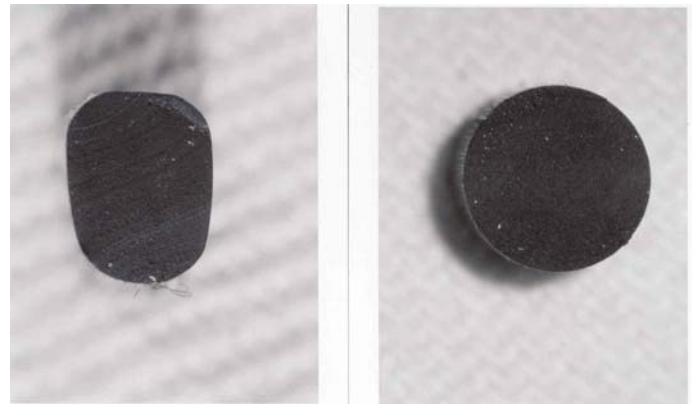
O-ring cross-section after aging at 300°F for 395 days (left); new O-ring on right. Photo taken five days after removal.
